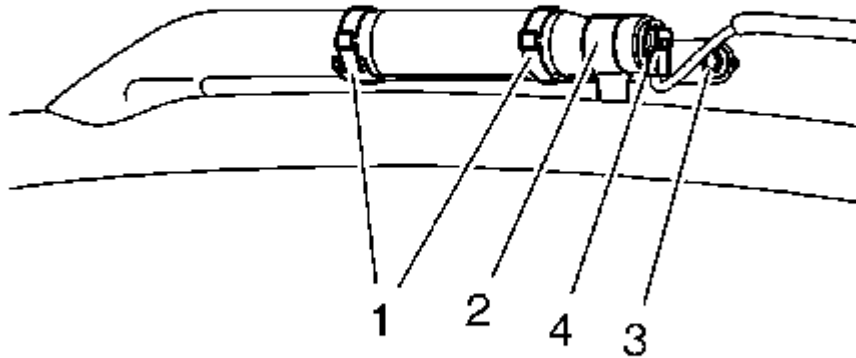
Location Of Wiring Harness Plug, Bracket And Fasteners
